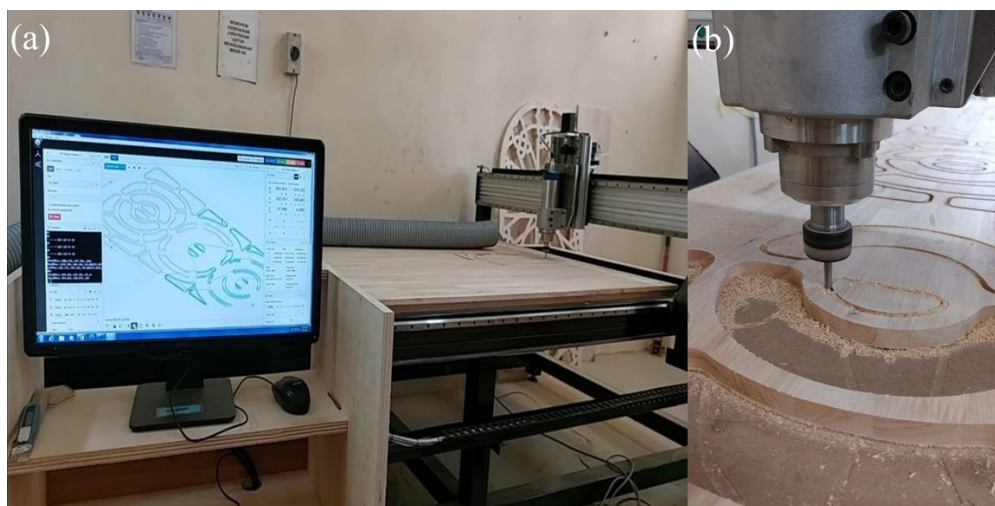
(a) G-Code used to run the CNC machine, (b) Drilling habitat enhancement model designs into geometrical shapes via CNC machine (Source: Authors)
